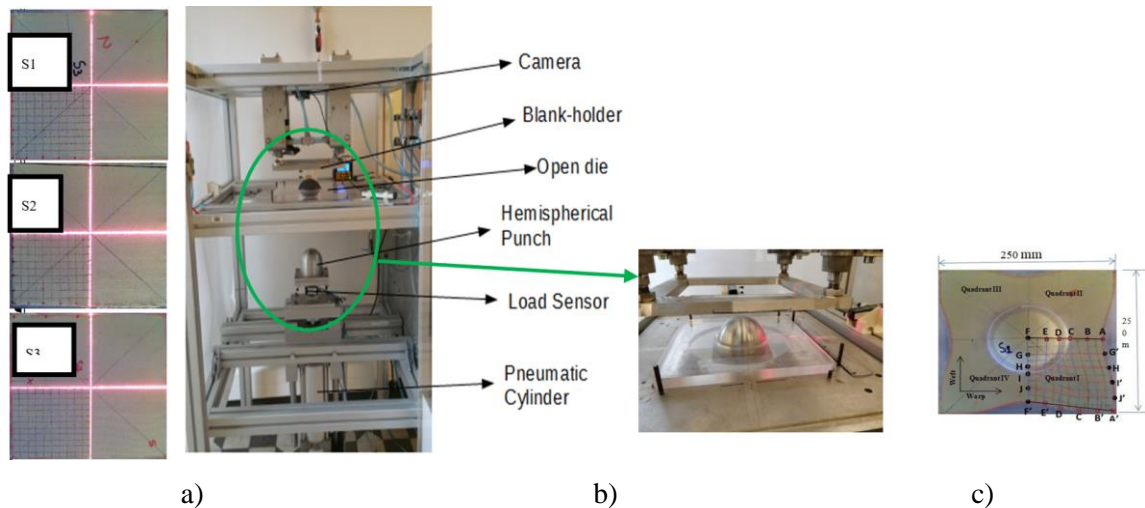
Pneumatic based mouldability testing machine set up and the moulding process (a) The prepared sample preforms, (b) Forming machine set-up and (c) Deformed samples.
